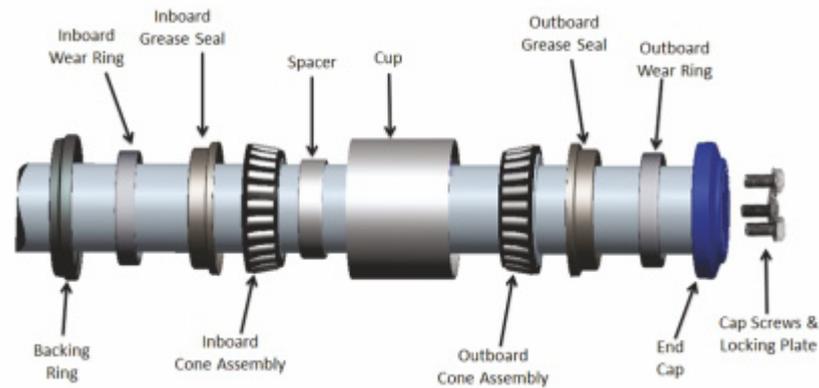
Exploded View of Cartridge Tapered Roller Bearing
